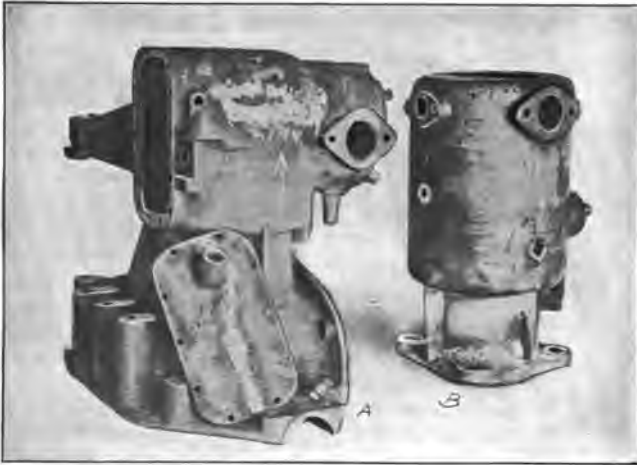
Cylinder A repaired by inserting a Steel Piece, bent to Shape, and autogenously welded in Place. Cylinder B has had Flange repaired
